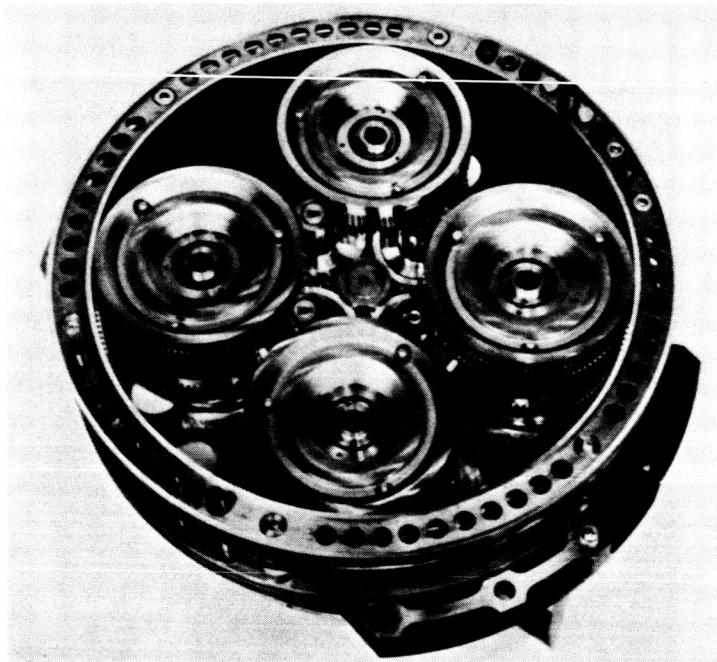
26:1 ratio control moment gyro roller gear drive.
